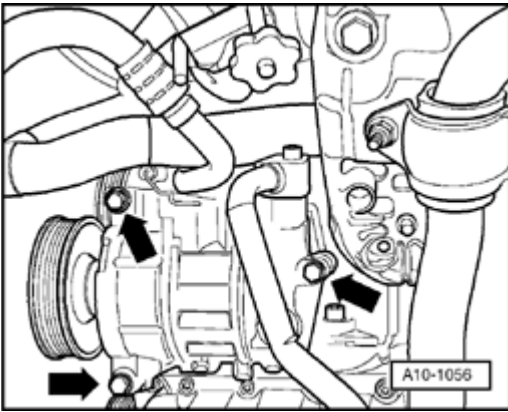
Unbolting Air Conditioning Compressor From Bracket
